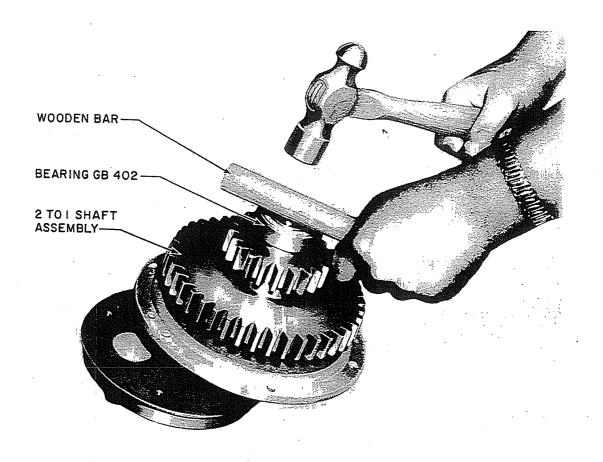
2 to 1 Shaft, Installation of Bearing GB402
